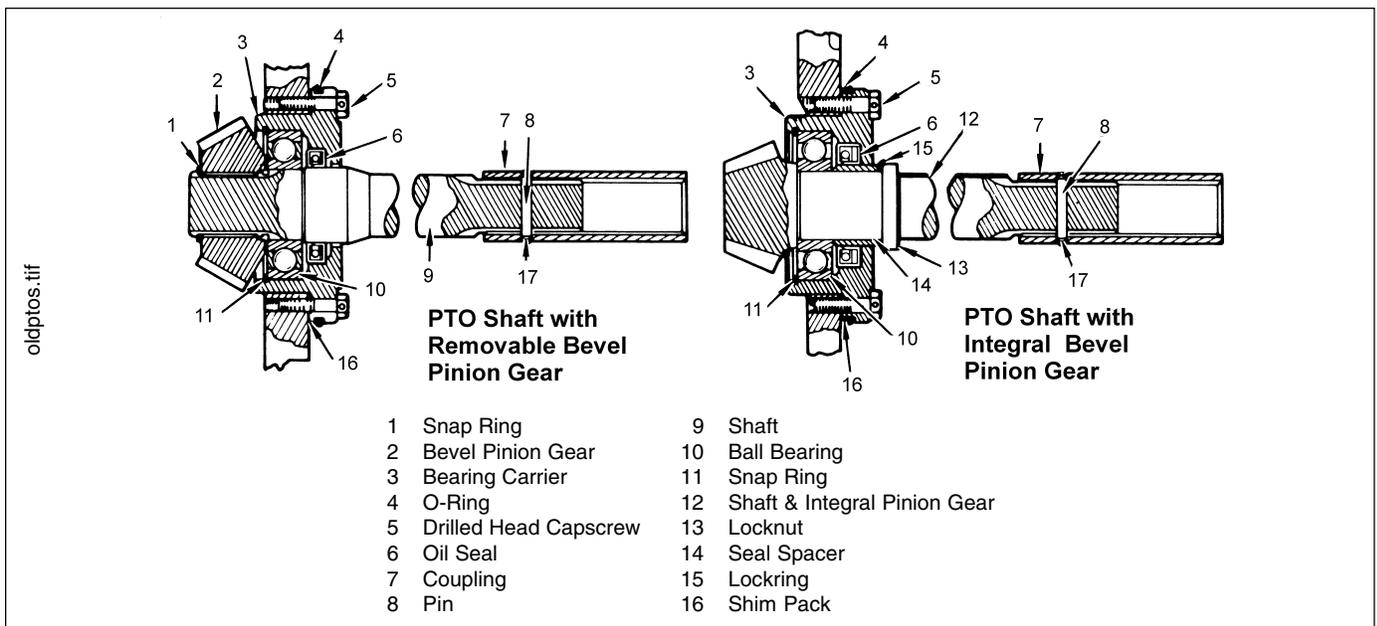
3 PTO Shafts - Last Used on W6FP-3699, W6FX-3699 & AW6F-1000;
